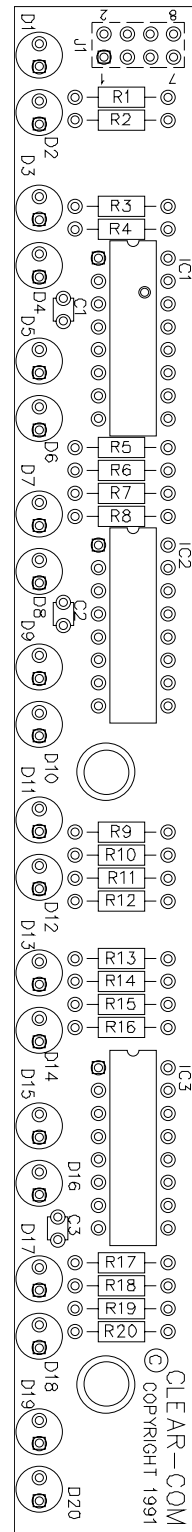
Assembly Drawing ICS-102/102T Selector Switch LED PCB
